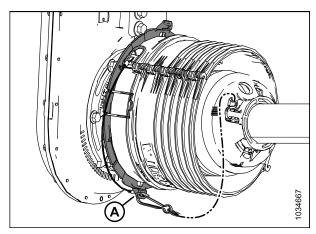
Chain Secured to Driveline on Float Module Gearbox
